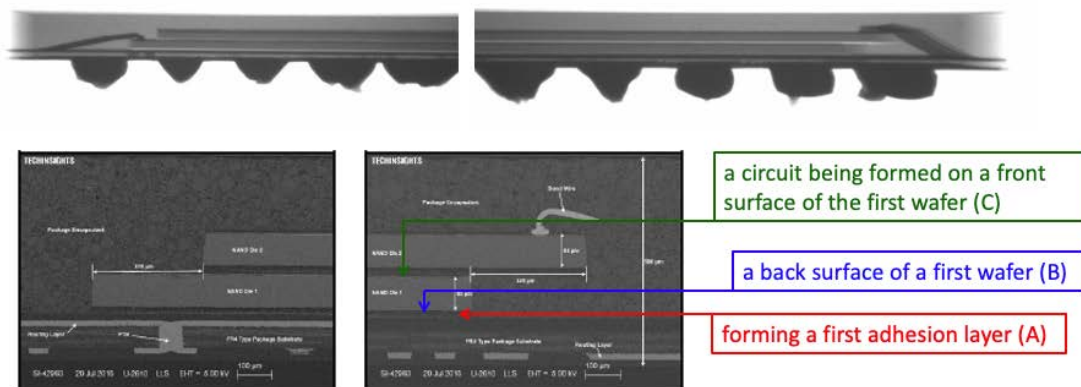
Left and right edges of NAND die stack in the package (SEM)
